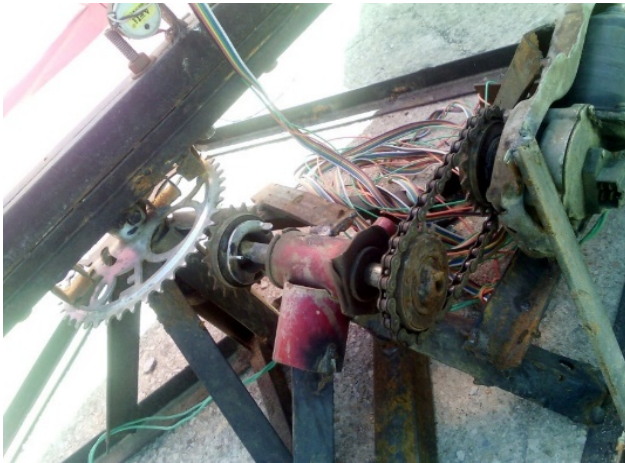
Fabrication of the motor and the wheel along with the gear drive
